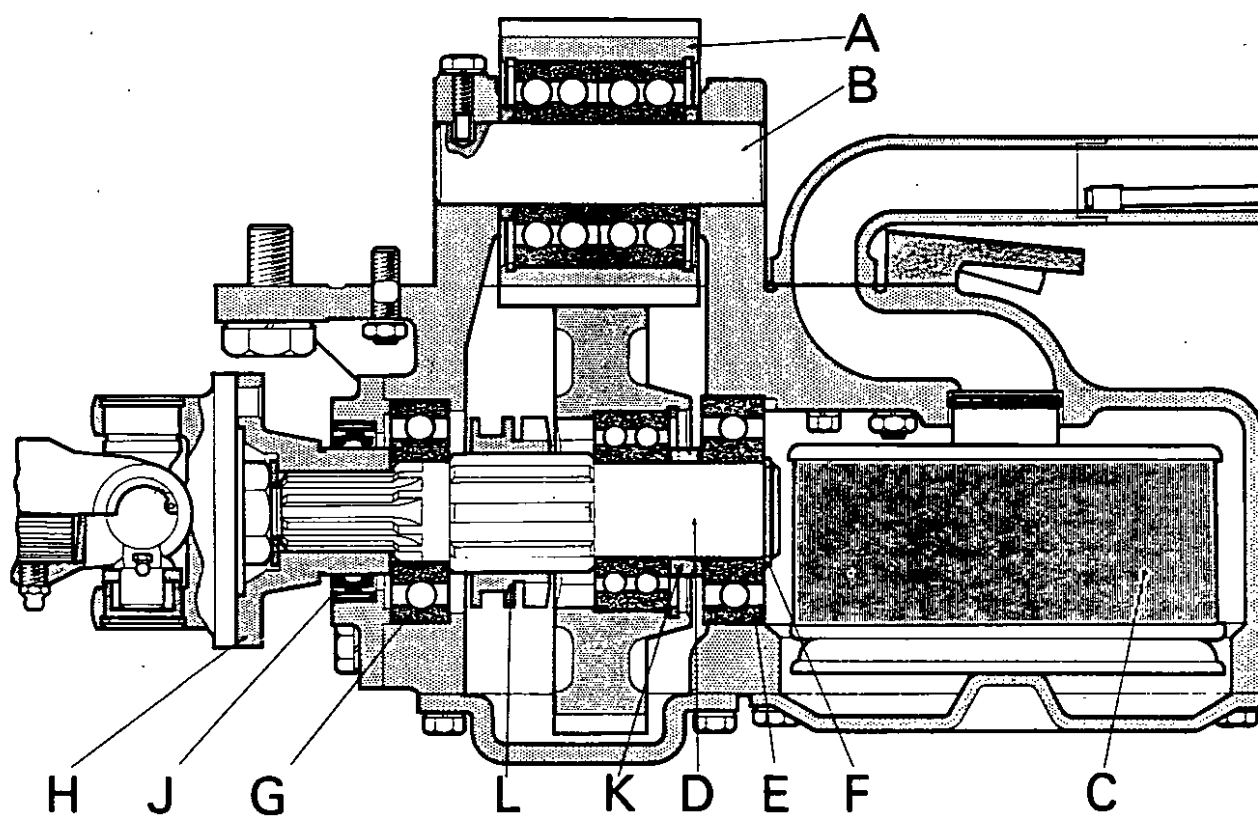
TRANSFER GEARBOX - 990 TRACTORS
